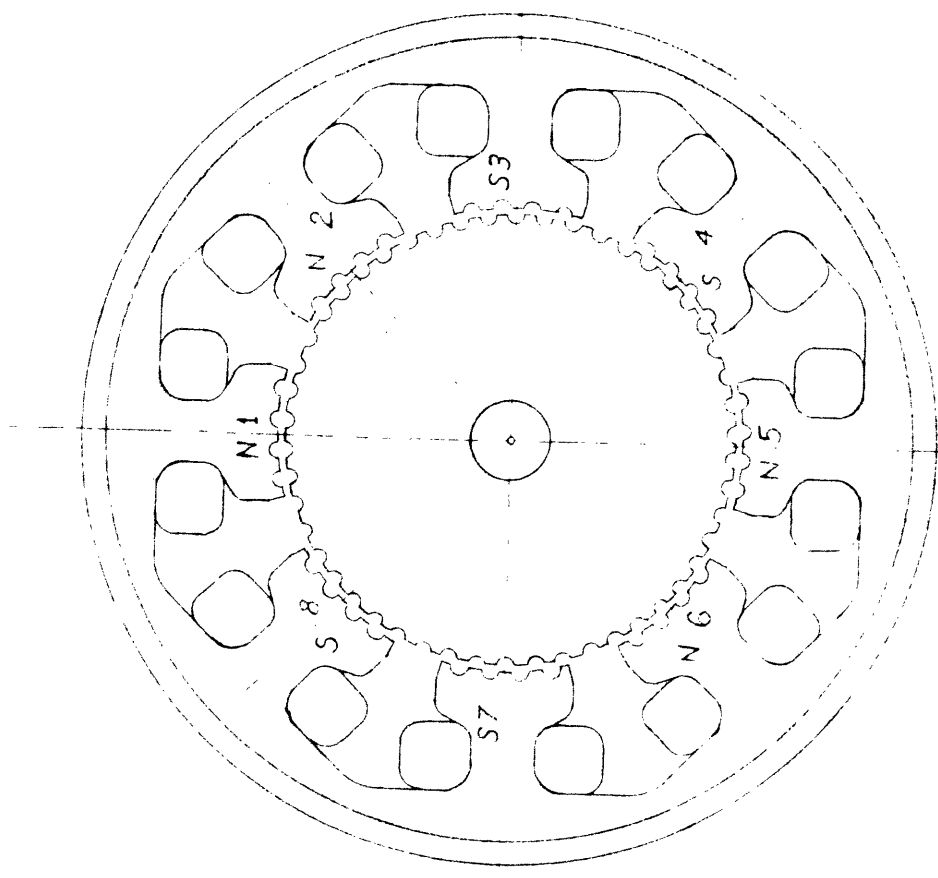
Cross Section of Synchronous Inductor Motor Perpendicular to Shaft
